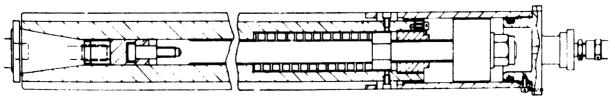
PATENTED TOOL CLAMPING AND HYDRAULIC RELEASE TO MAIN SPINDLE
